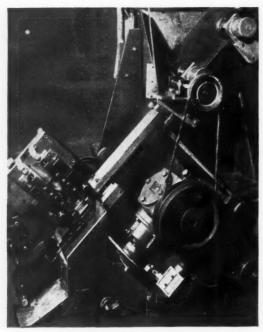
Rollers for roller bearings are automatically inspected for length and diameter in this Sheffield Bearing Checker. The selector will check and segregate 3,600 pieces per hour into four classifications.
